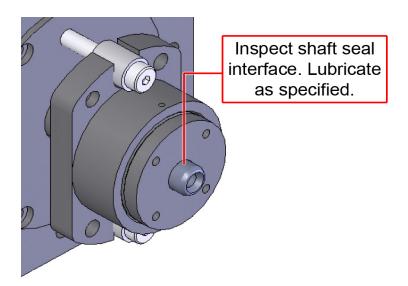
Wet Cut Rotary Union Shaft Inspection
